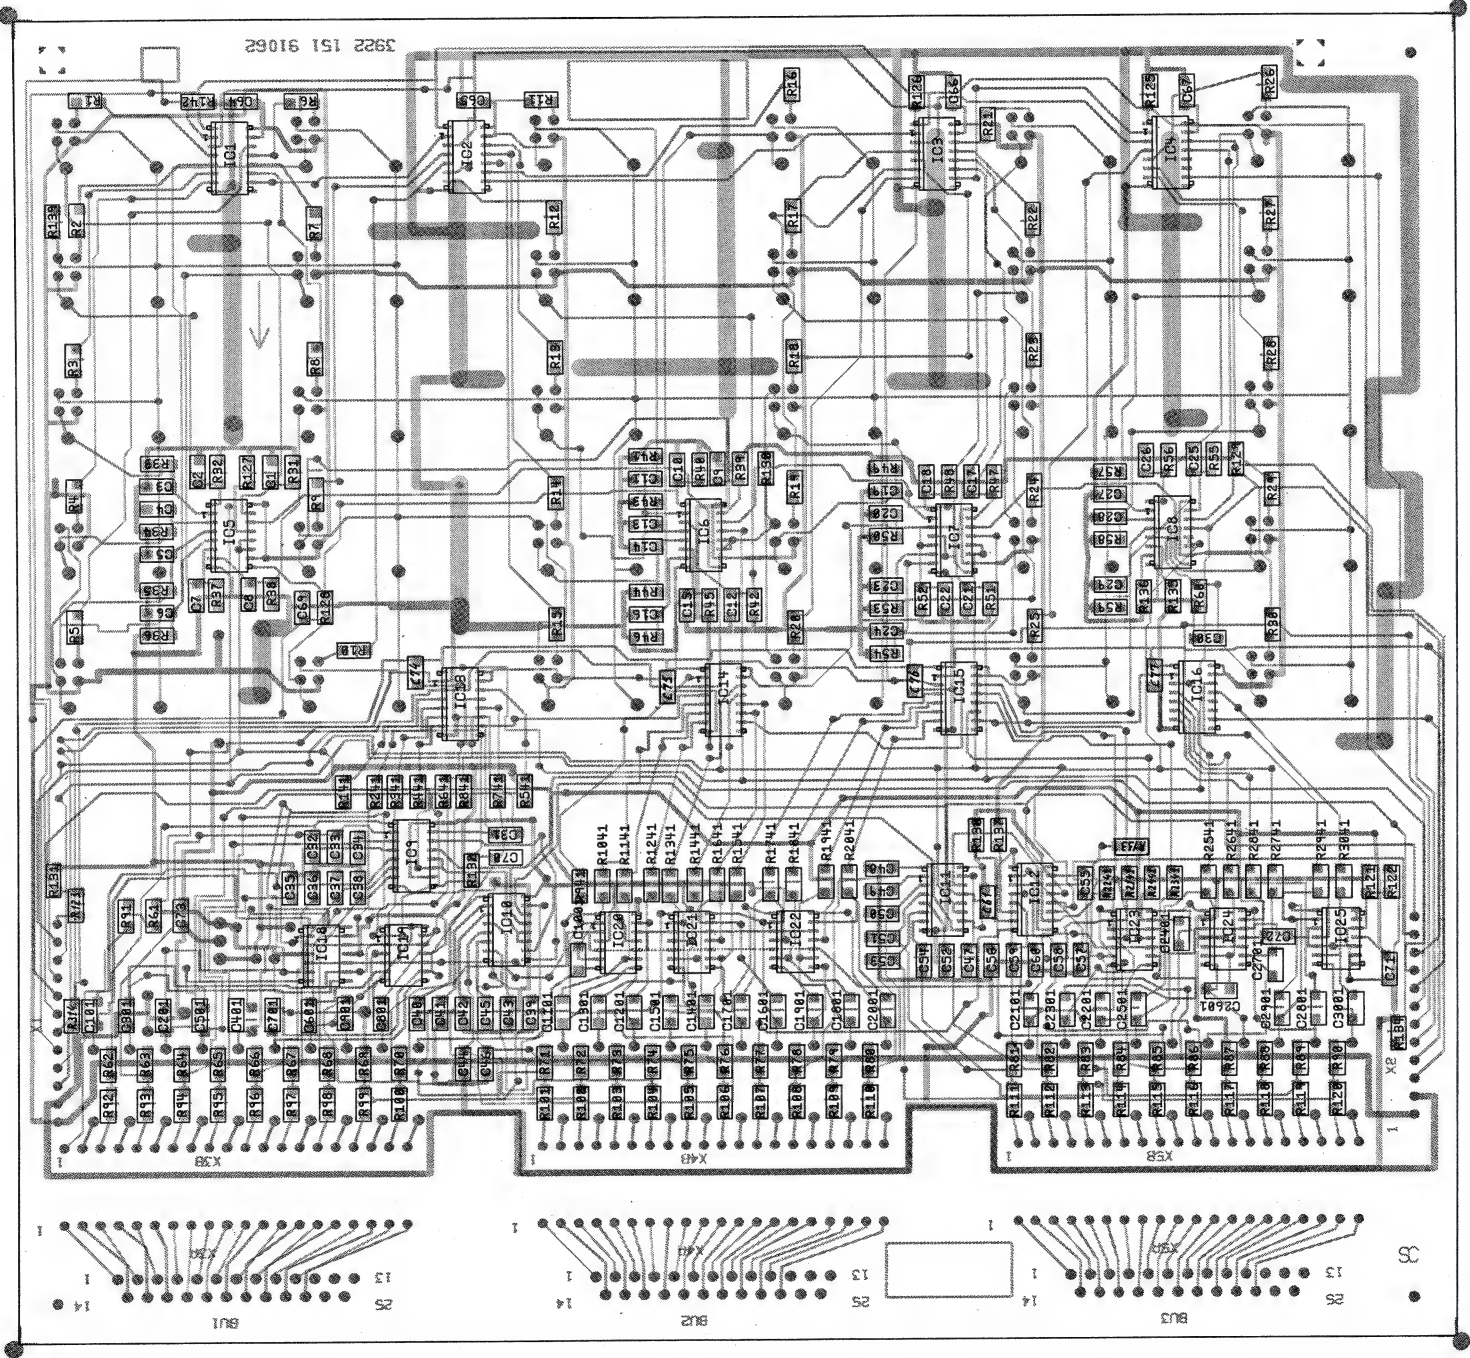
ASSEMBLY DIAGRAM OF LBB 3386/02, BOTTOM SIDE
